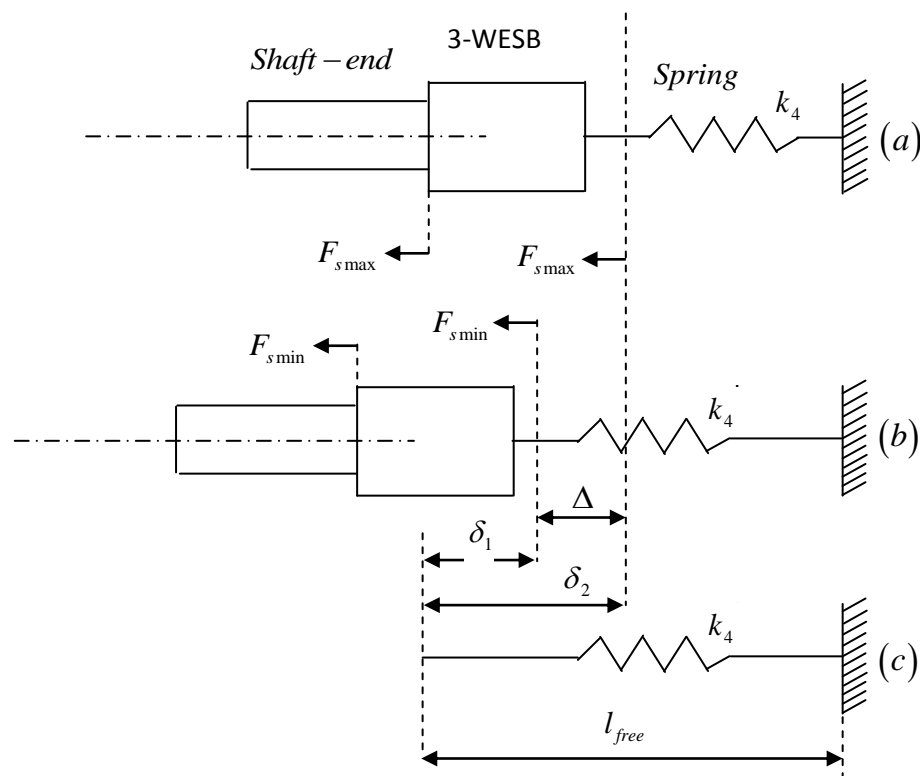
(a) Shaft-end assembly when rotor is not whirling, (b) Shaft-end assembly when the rotor is whirling at maximum amplitude. (c) Free length of spring.
